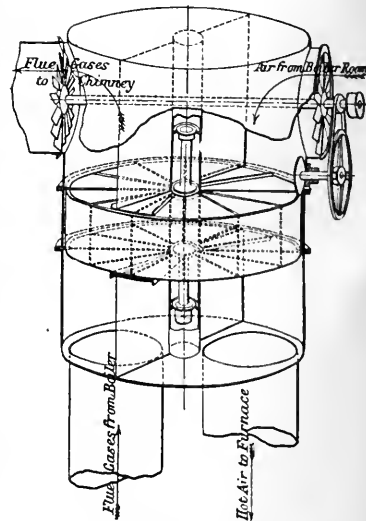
LJUNGSTROM AIR PREHEATER FOR BOILER FURNACES
